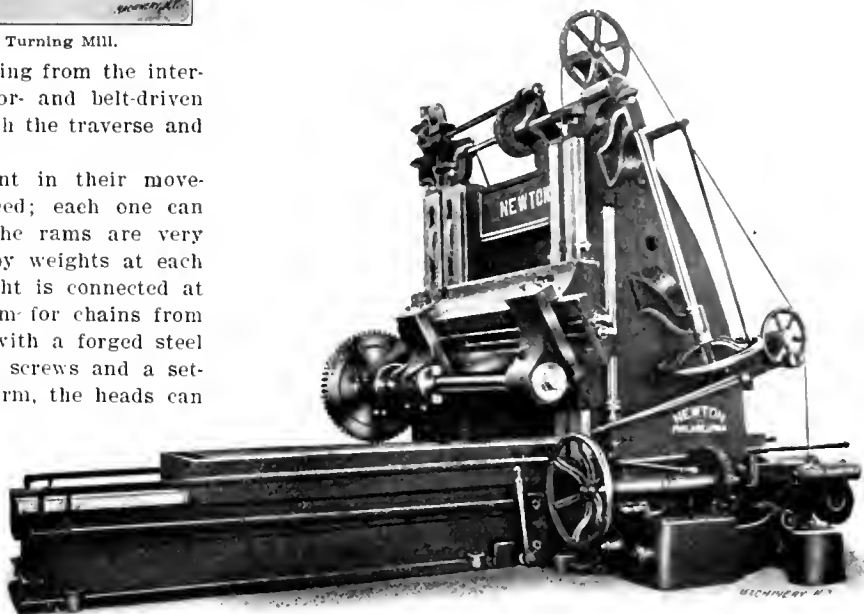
Newton Horizontal Milling Machine from Operator's Side.
